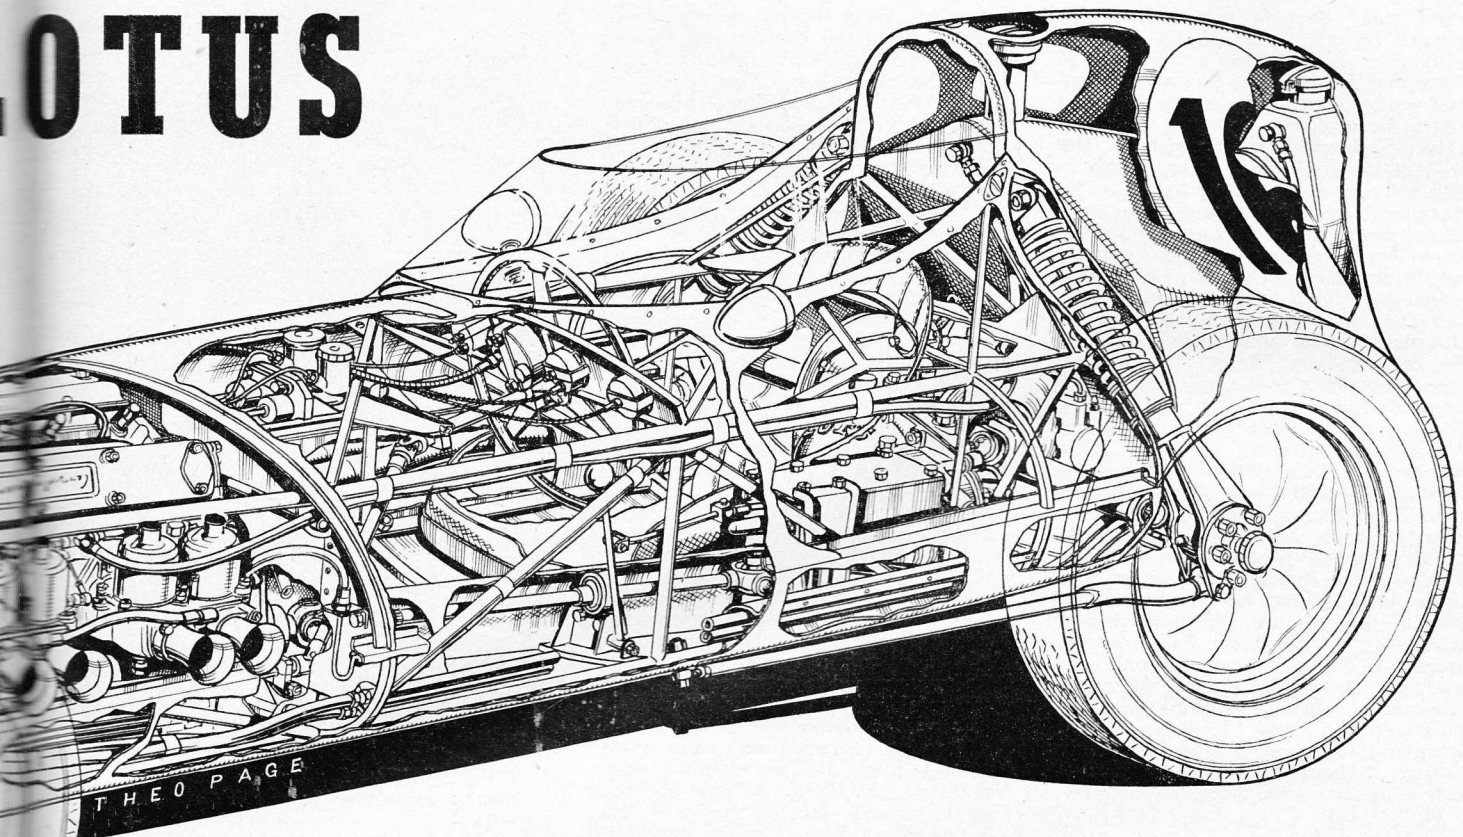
DETAIL of the space-frame chassis, showing how the steering column is cranked through two universal joints to bring it to the left of the cylinder block.
